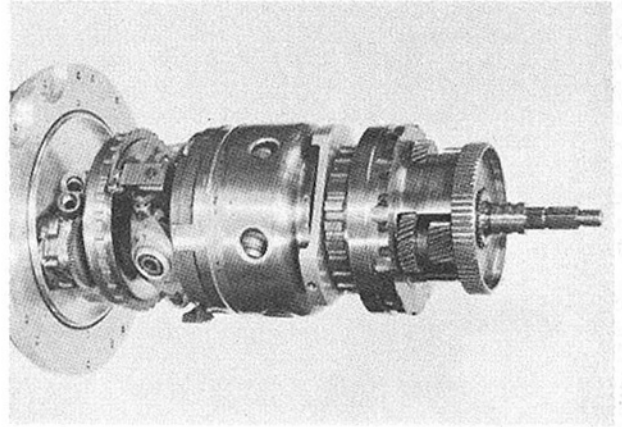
Two regime after-gearing behind a 100 mm double-sided rolling assembly
